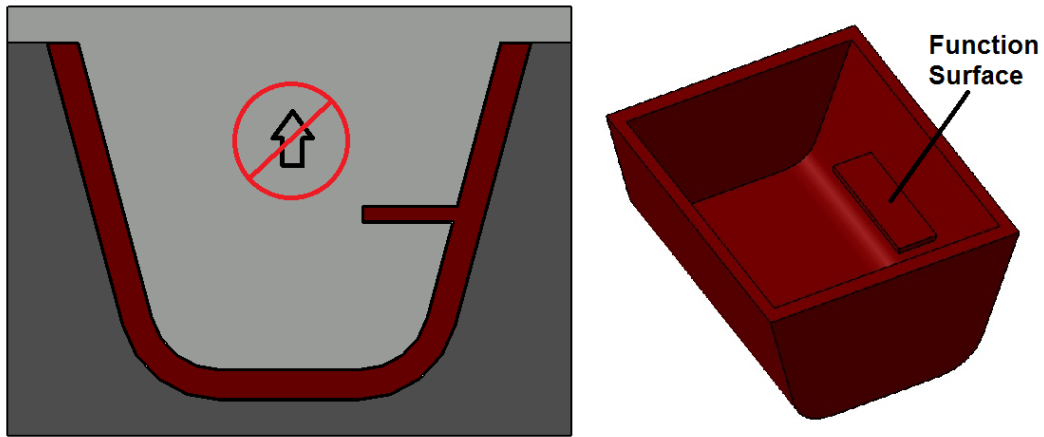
An internal undercut caused by a function surface that cannot be molded, the part will get stuck in the mold. A cross-section with the closed tool is displayed on the left.
